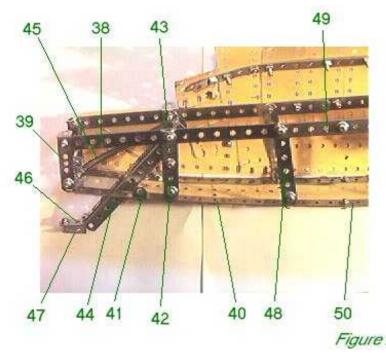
shows the rear end of the framework with the tailskid in place. A 9 1/2" perforated strip 38 is bolted to a 2" perforated strip 39 and to a 1/2" angle bracket with the slot facing inwards. The slot provides a fixture for the tailplane assembly later.
